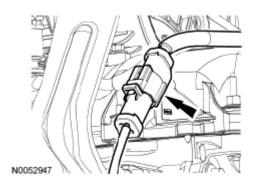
Locating PSP Switch Electrical Connector Courtesy of FORD MOTOR CO.
